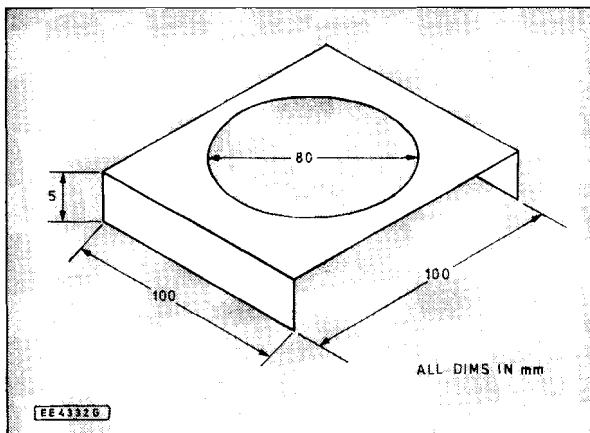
Adaptor plate for optional fan mounted on the heatsinks - not shown in photographs.
